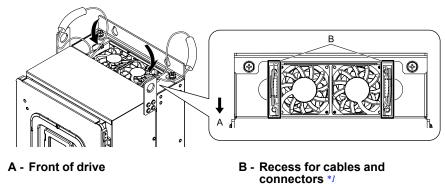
Put the Cables and Connectors in the Drive Recess
